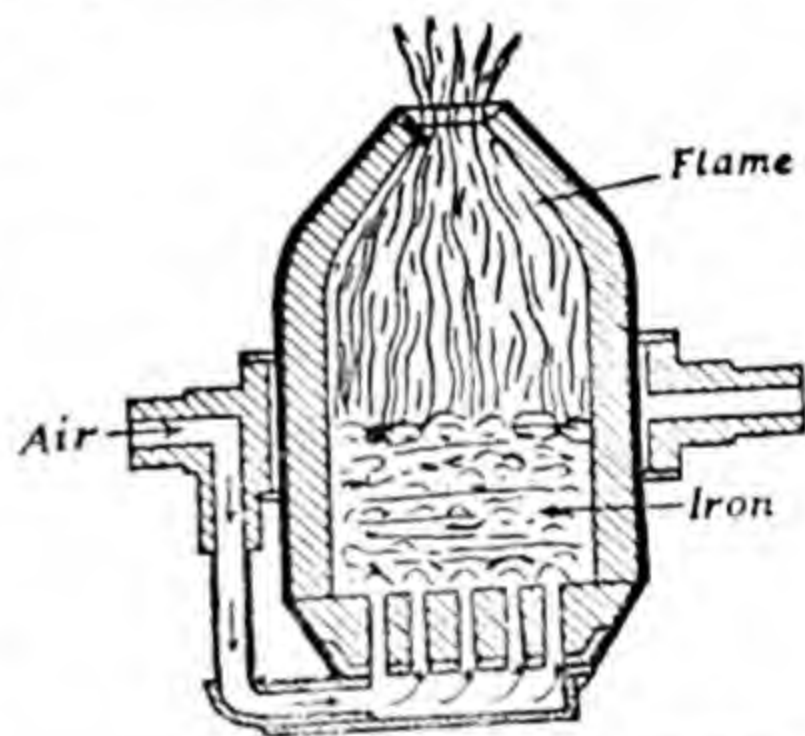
SECTION OF BESSEMER CONVERTER.
